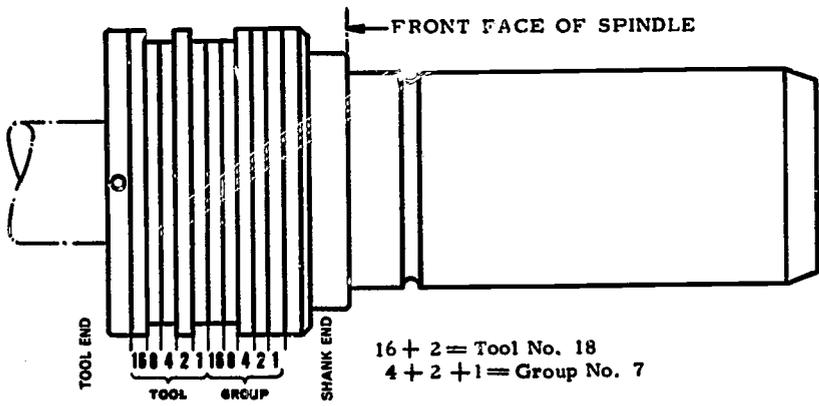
Coding rings, Milwaukee-Matic tool holders
